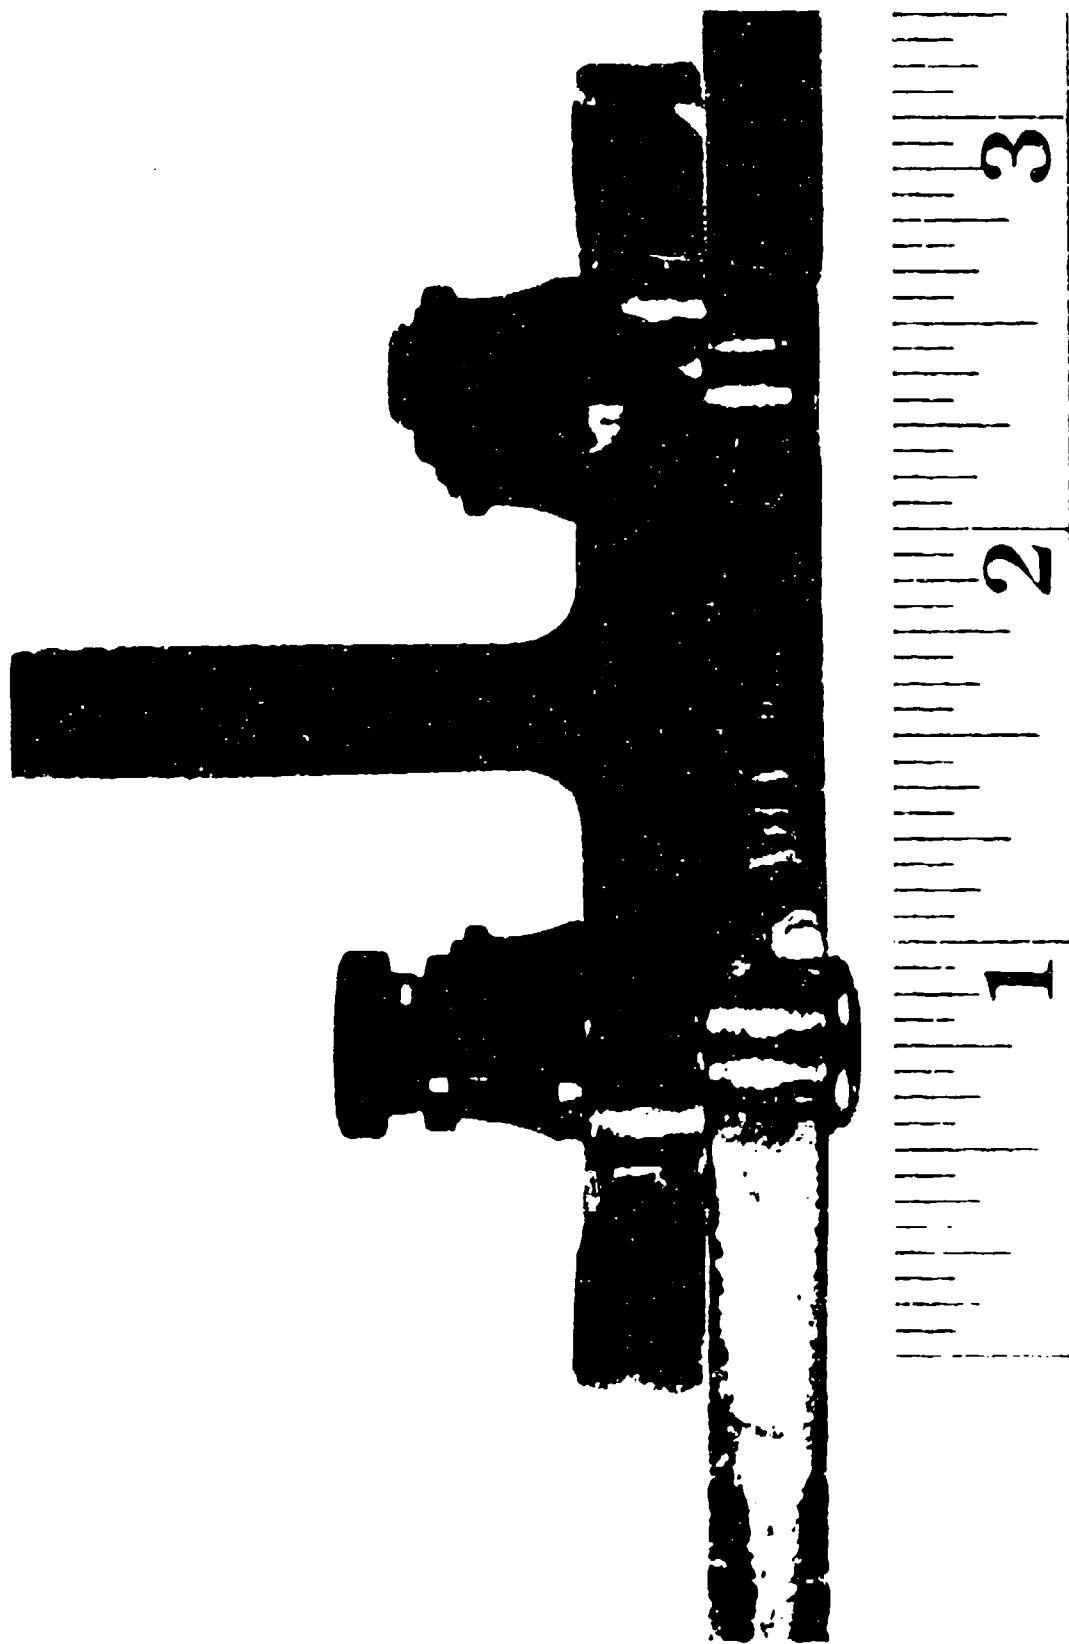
C. Specimen No. 63 Fracture Surface Subsequent to Failure
